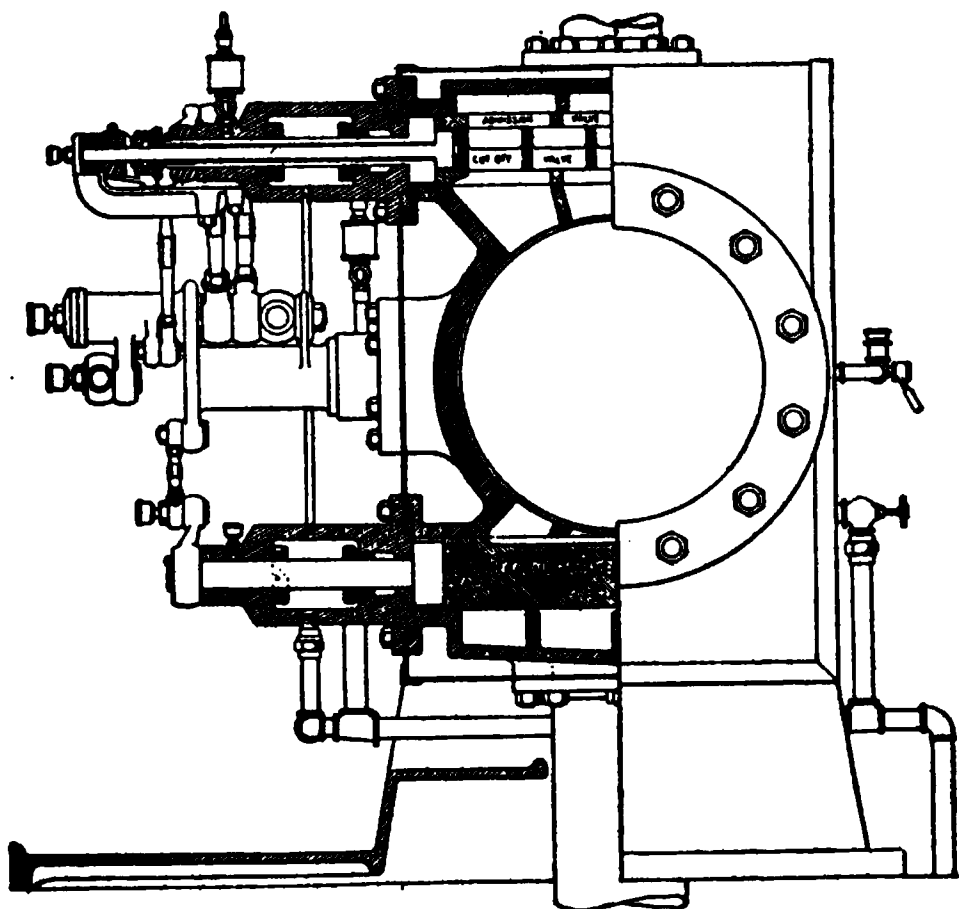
,070.—The Clark four valve riding cut off engine; end view showing valves and connections.
